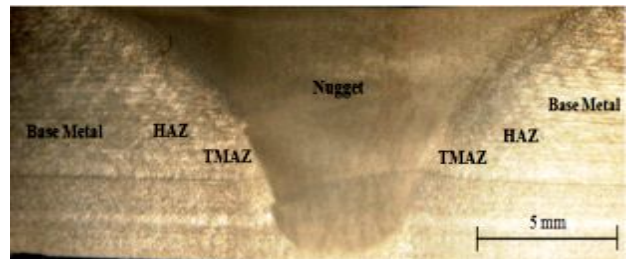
an optical microscope image of the cross-section of weld
